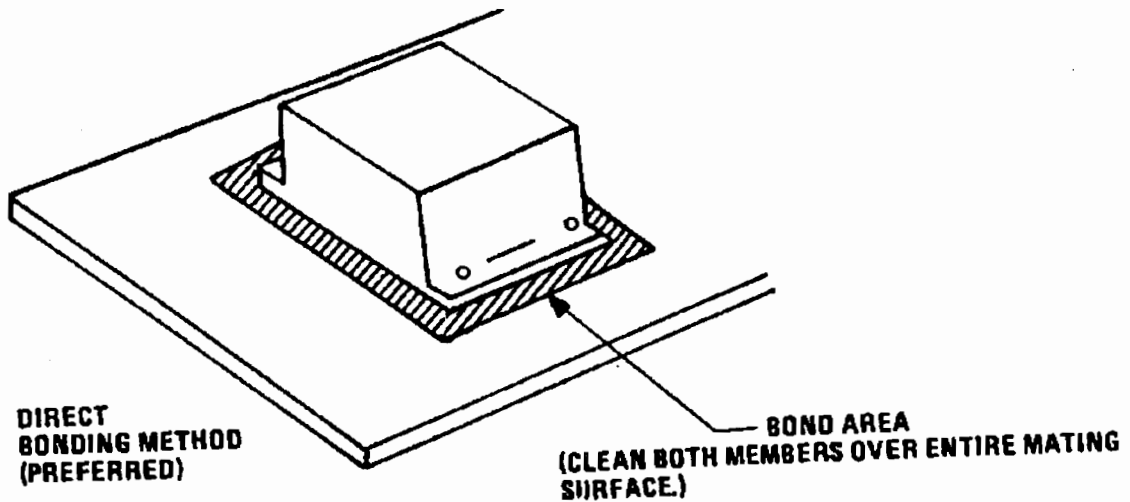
BONDING OF EQUIPMENT TO MOUNTING SURFACE
